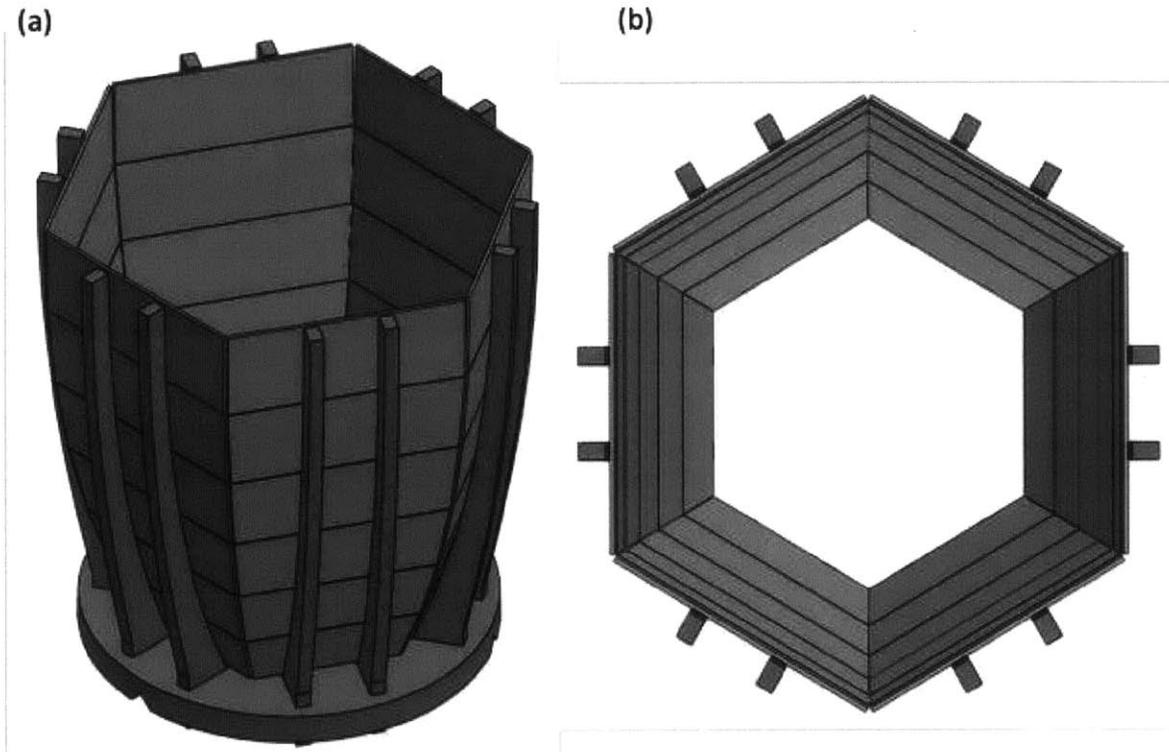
CAD model of Prototype 2 - (a) Isometric view; (b) Top view.
